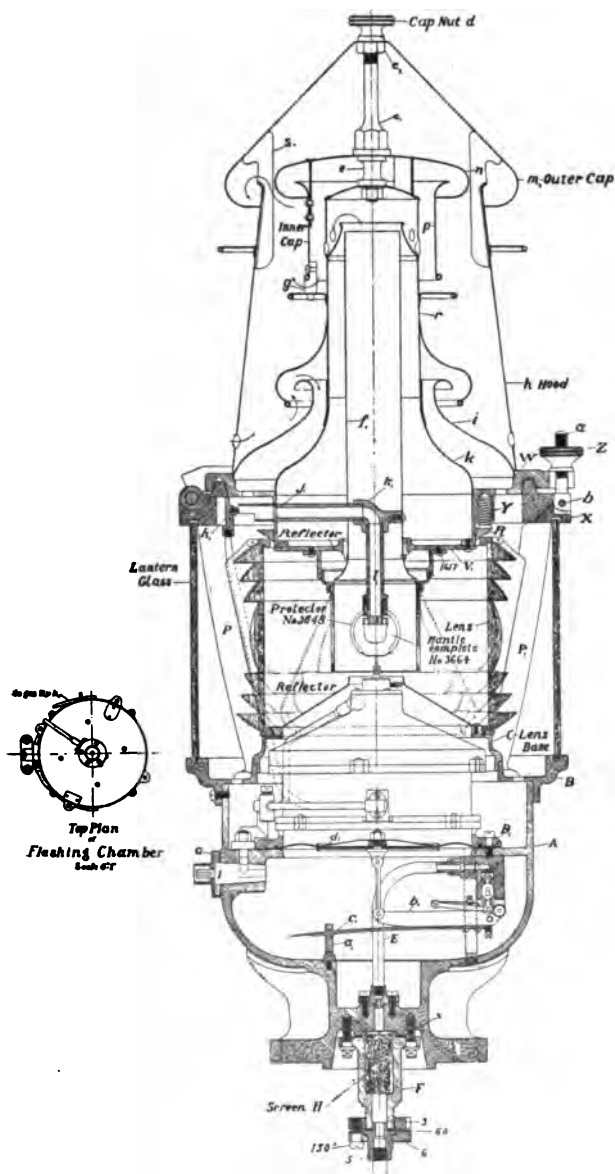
Pintsch Buoy Lantern with Mantle Burner.
